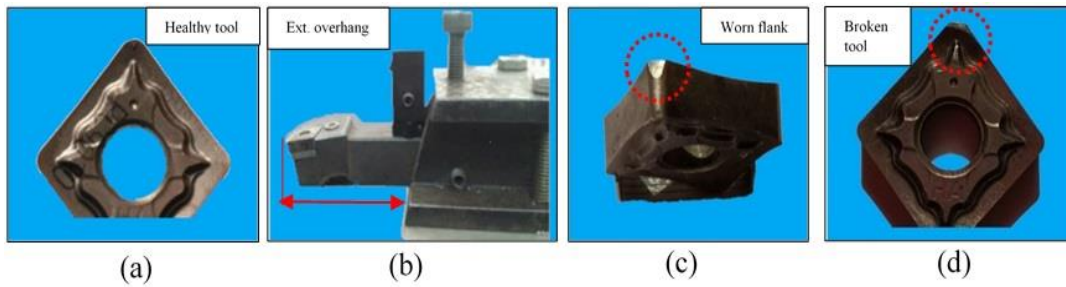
Photographic image of various tool wear (a) Healthy tool (b) Extended overhang (c) Worn flank (d) Broken tool
